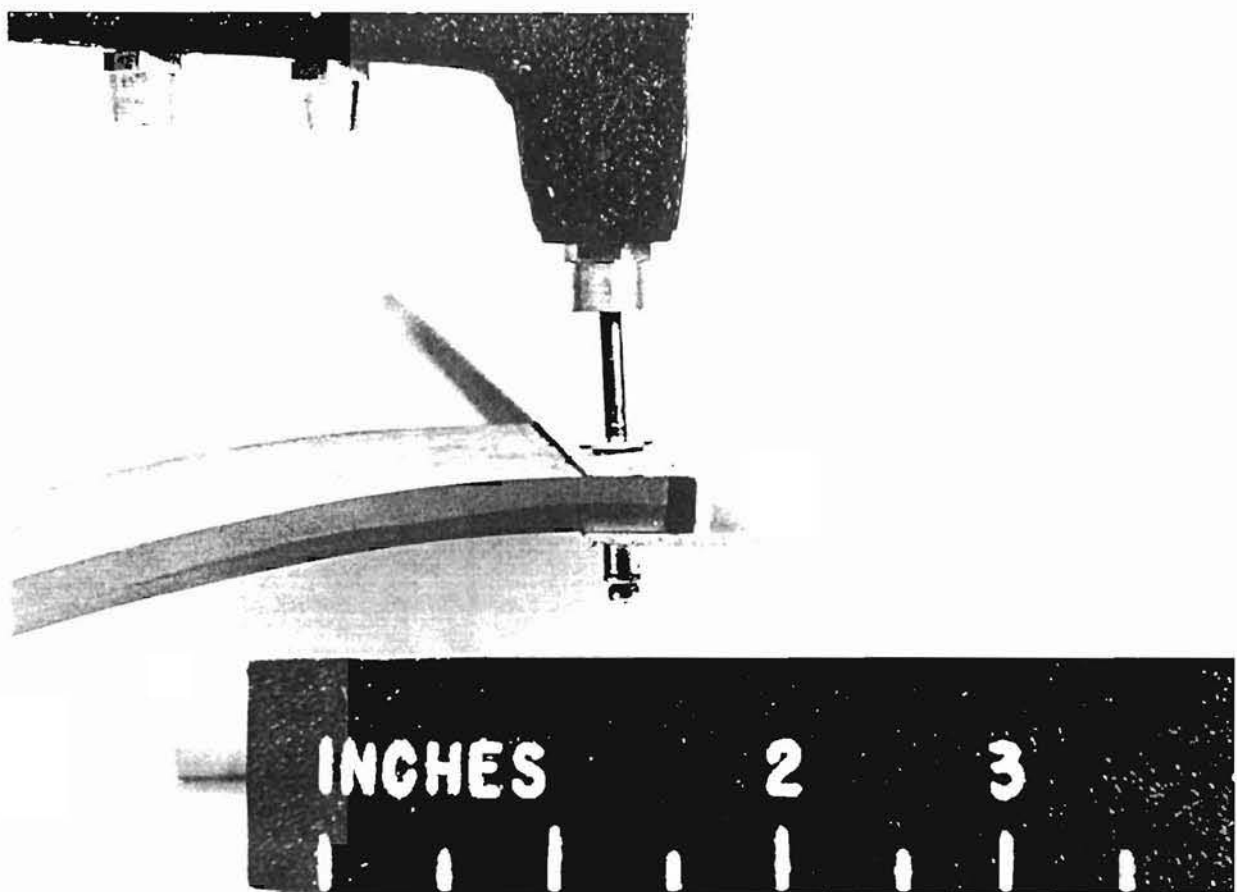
Pop-riveting the fastener to the sleeve material.
